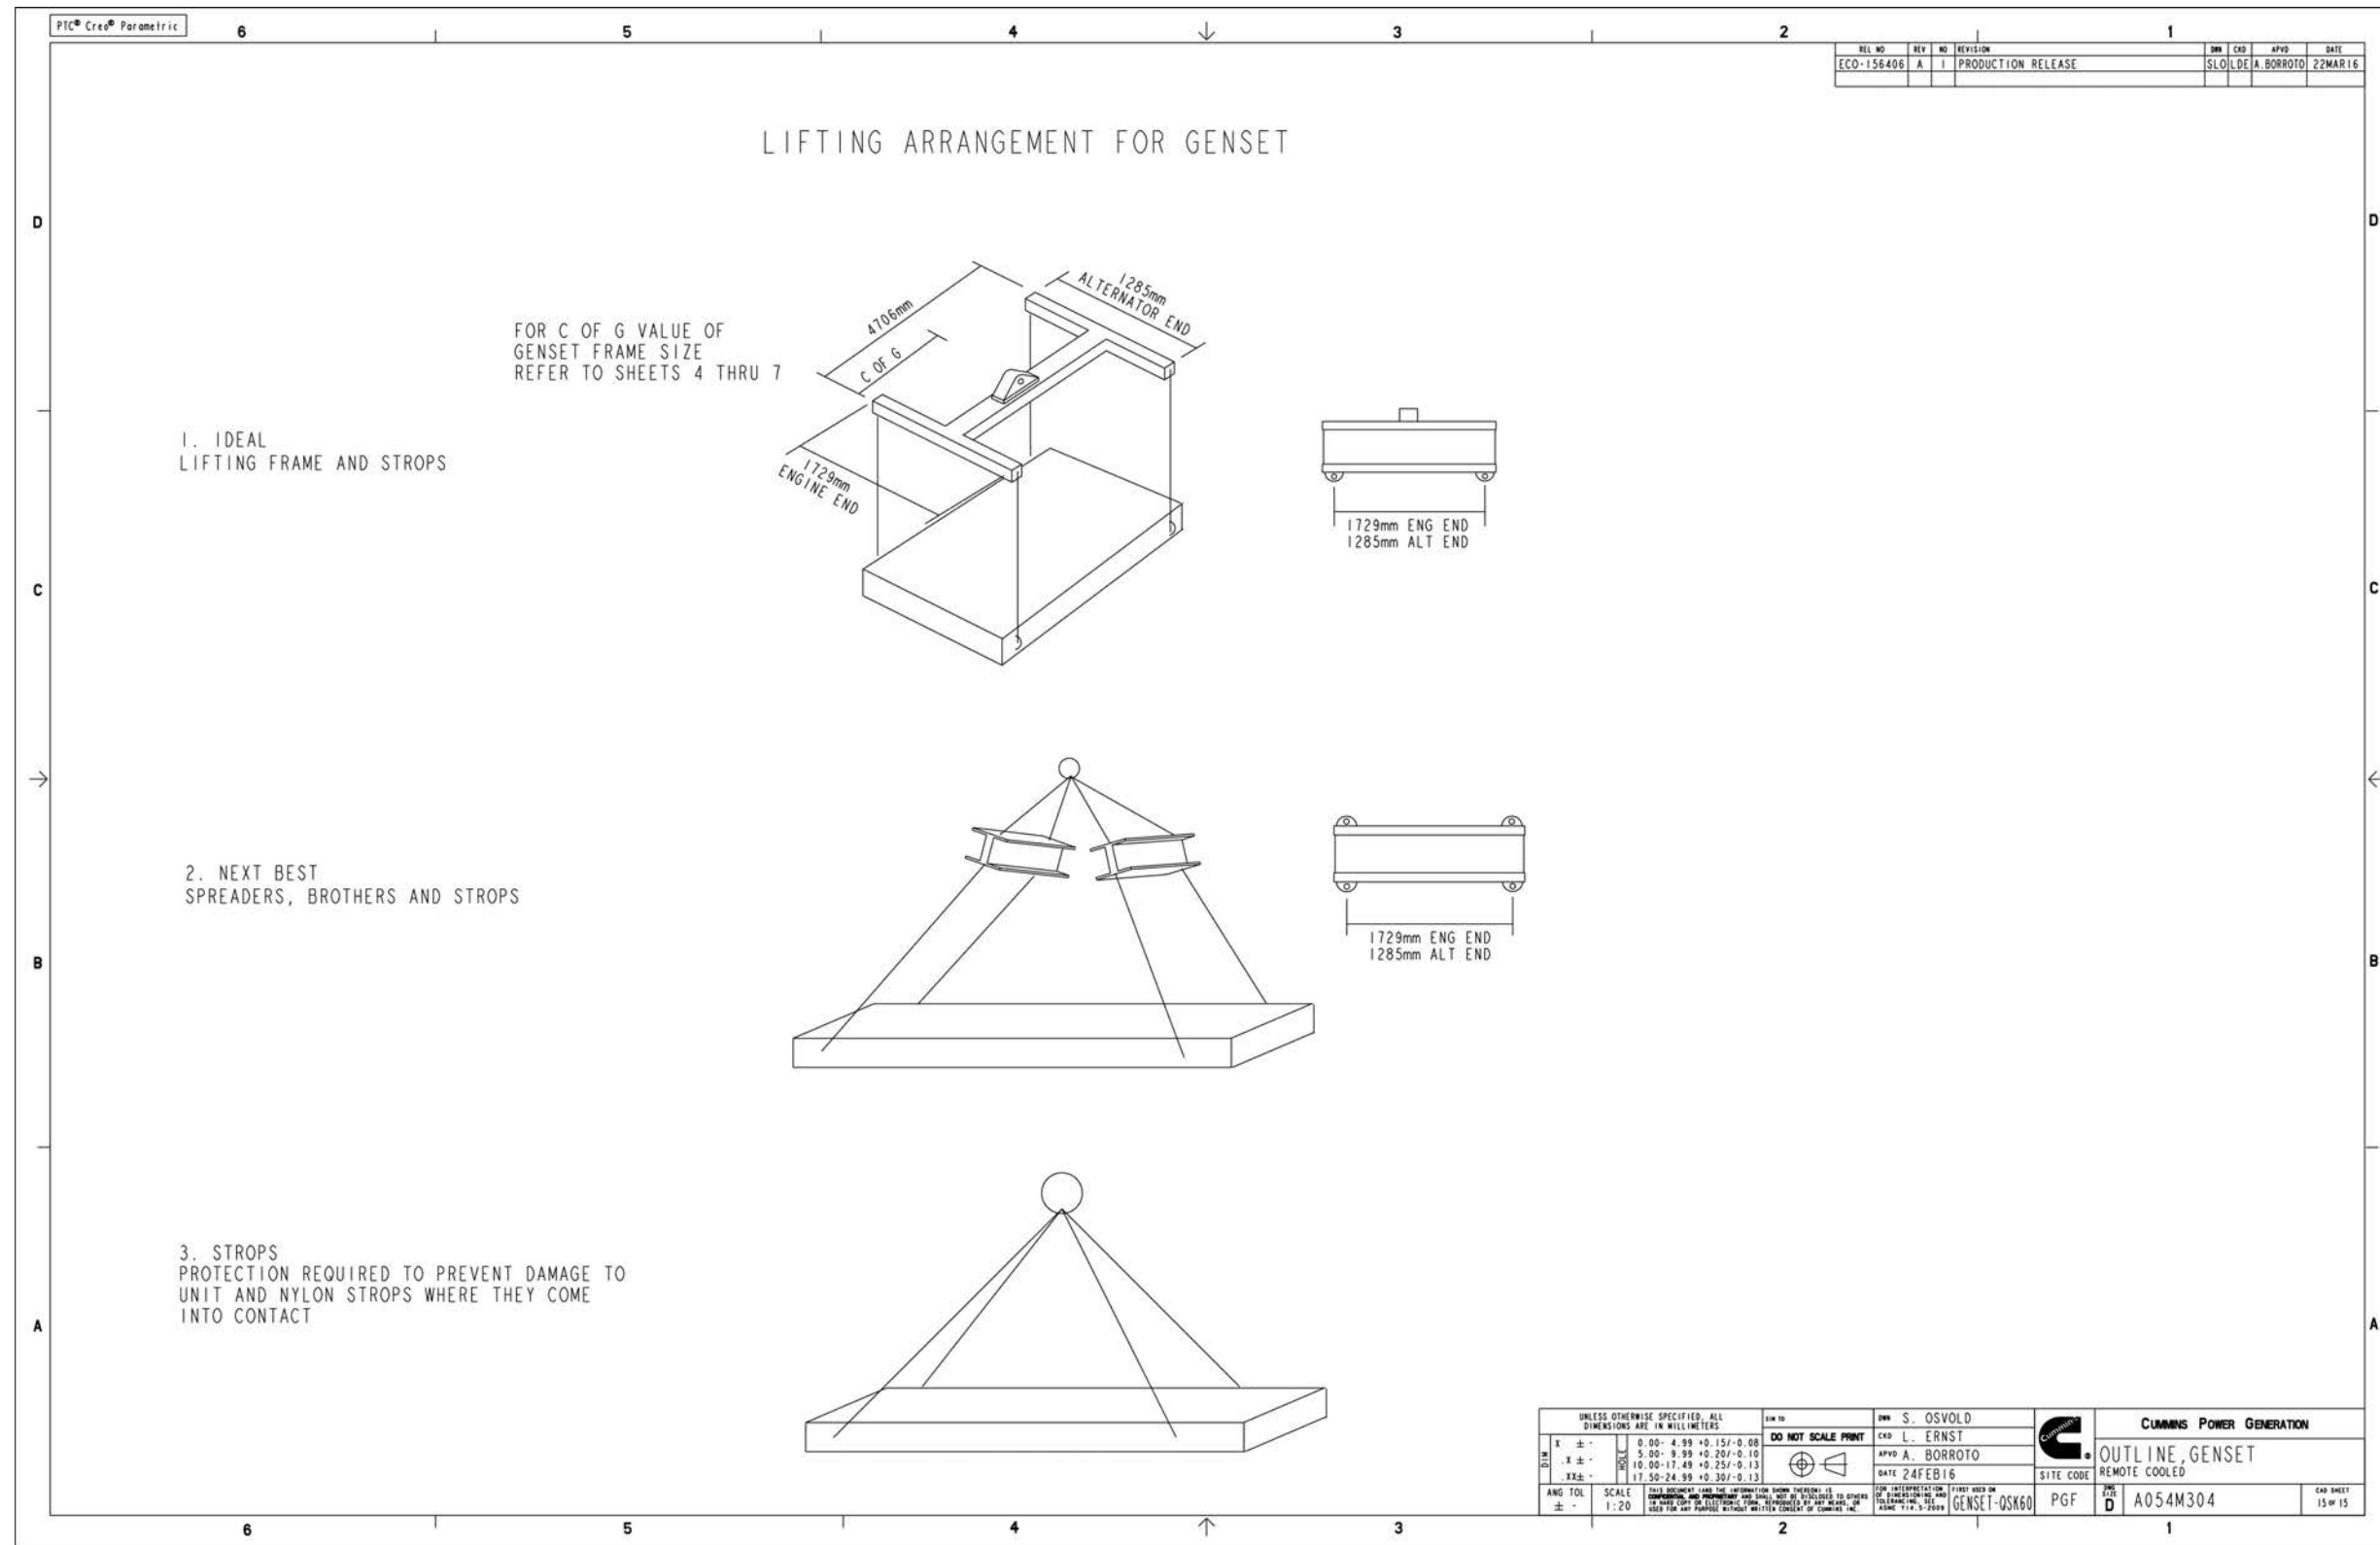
GENERATOR SET WITH REMOTE COOLING OUTLINE DRAWING (SHEET 15)
